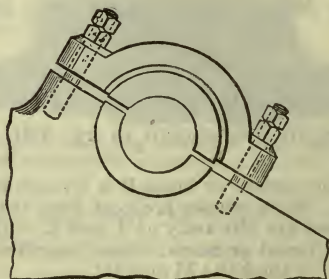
Main bearing with liner adjustment for a horizontal engine. The brasses are divided obliquely so that the resultant thrust of the shaft will come centrally, and not at the joints.
